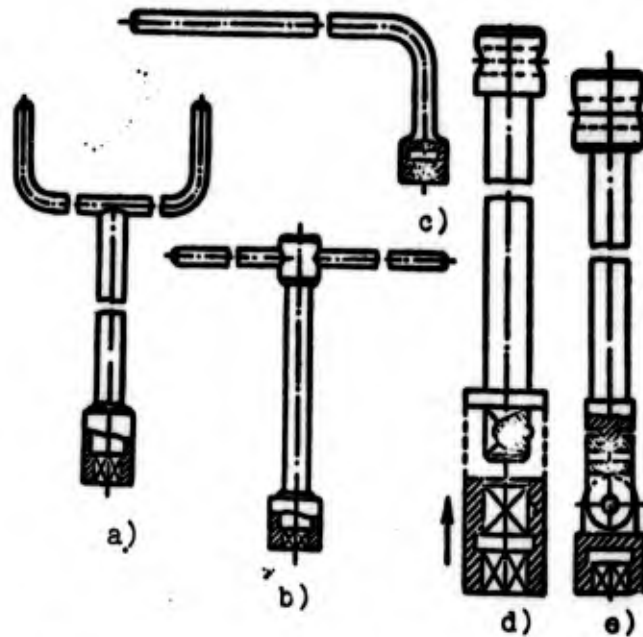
Design of socket wrenches: a) socket wrench with tap wrench for rotation; b) socket wrench with insertable tap wrench; c) wrench with L-shaped handle; d) wrench with detachable head; e) hinged socket wrench.
